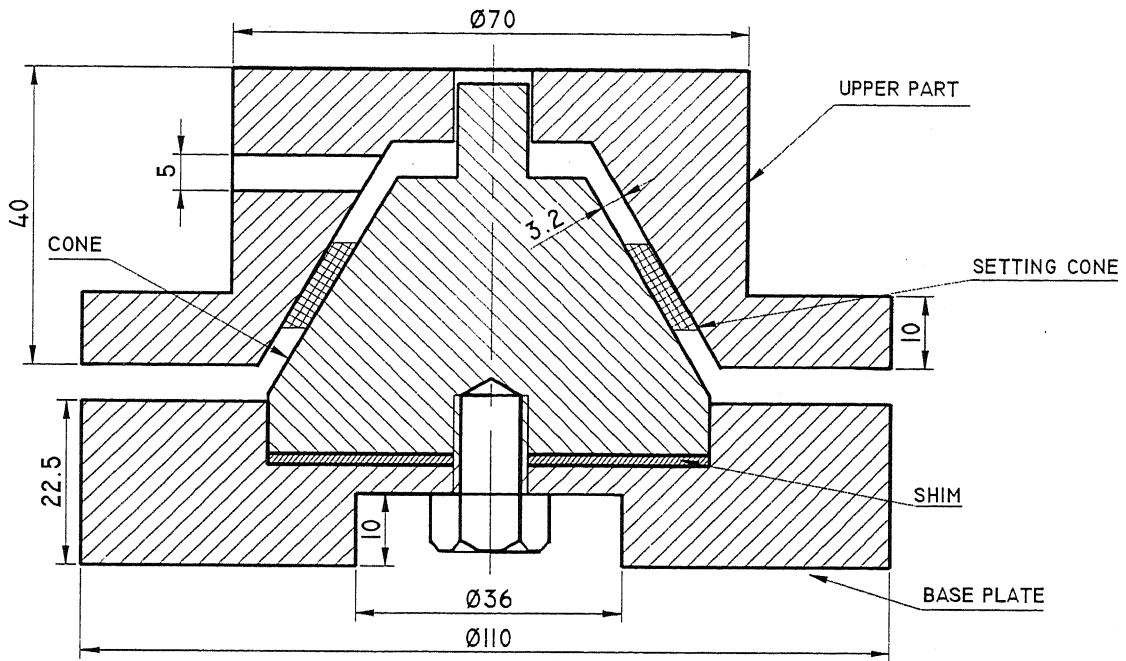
a: Assembly of Die-Set and Setting Cone
